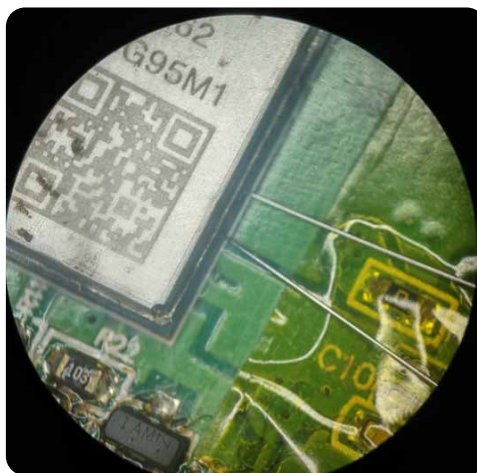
Probes Inserted Parallel to PCB with Kapton Tape
